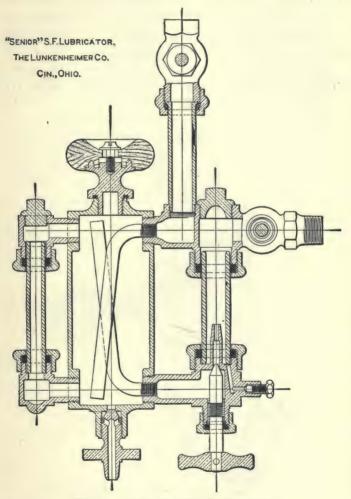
LUNKENHEIMER LUBRICATOR.
